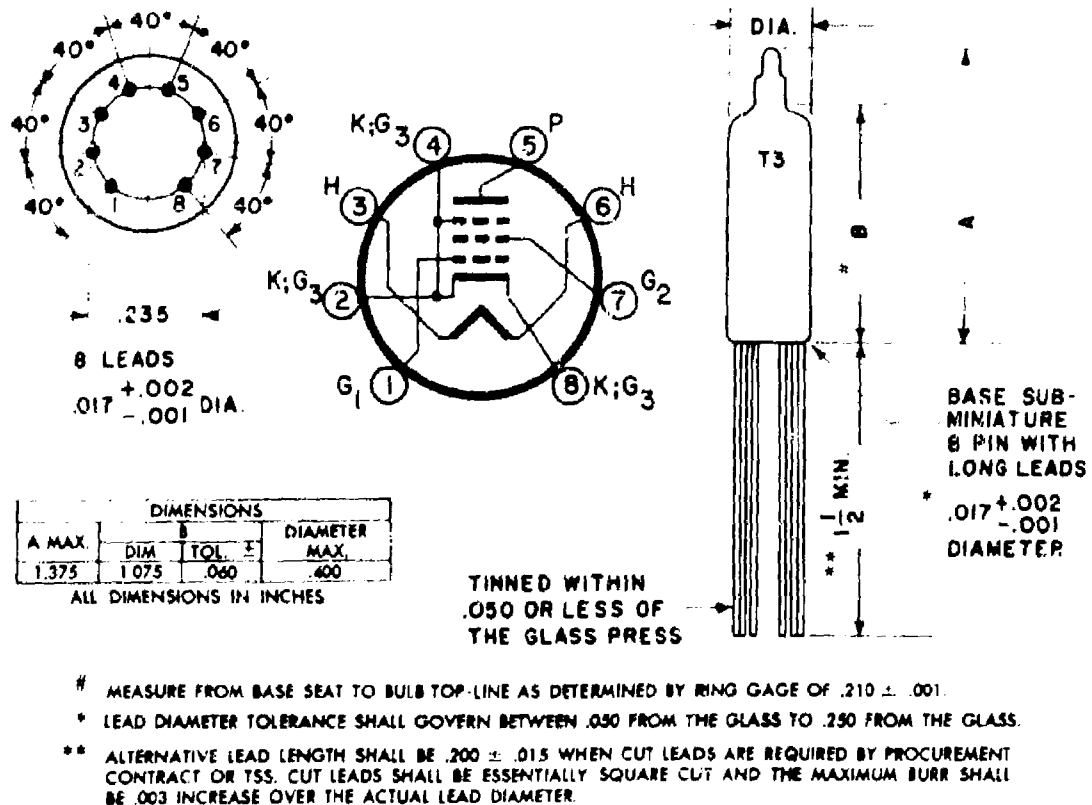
Outline Drawing and Base Diagram of Tube Type JAN-5899
